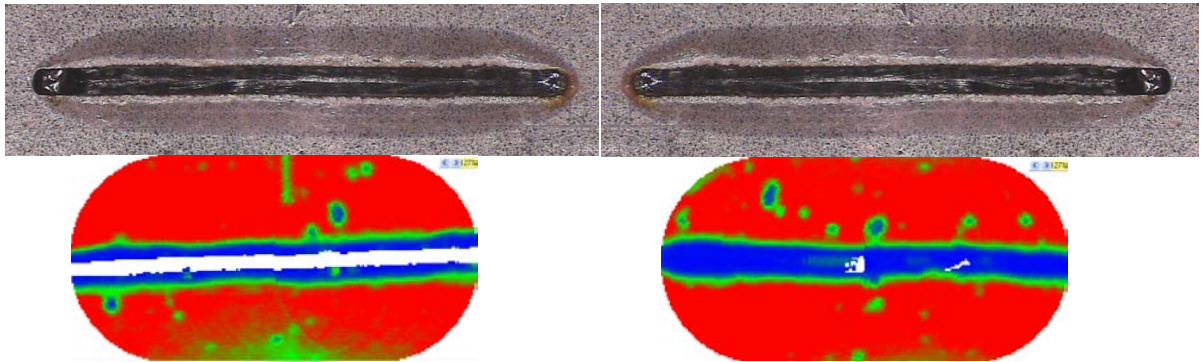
Weld top bead (0.3mm gap, sample A) and Amstech result from top bead (L) and bottom bead (R)
